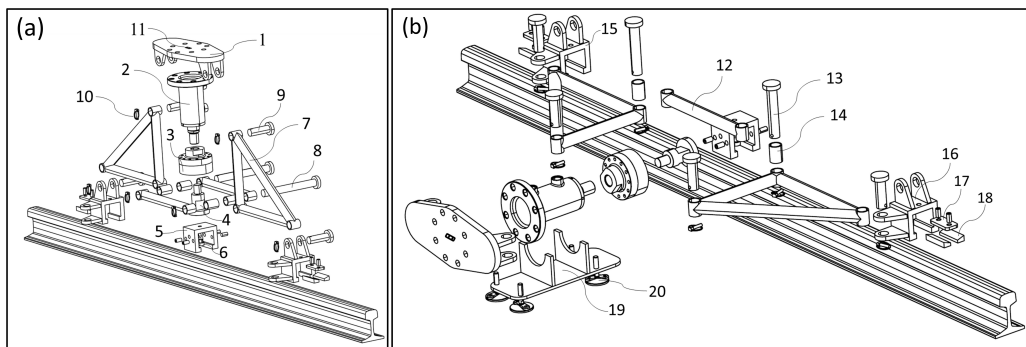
Exploded view of the calibration device: (a) vertical usage, (b) horizontal usage.
